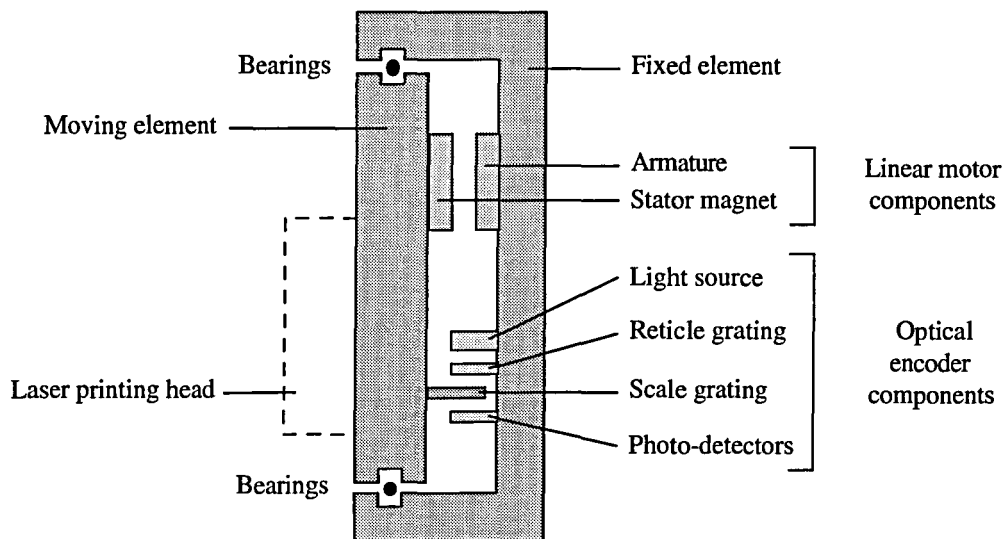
Side view showing the laser printing head support, linear motor, and linear optical encoder assembly. The moving element moves in a plane orthogonal to the plane of the page.
